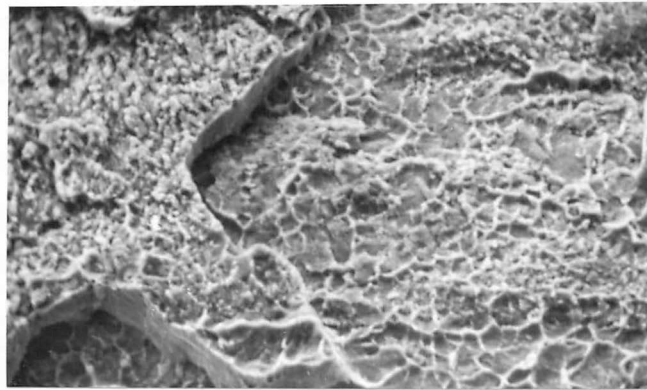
Flat spot on fracture face of a Hastelloy X flash weld.
